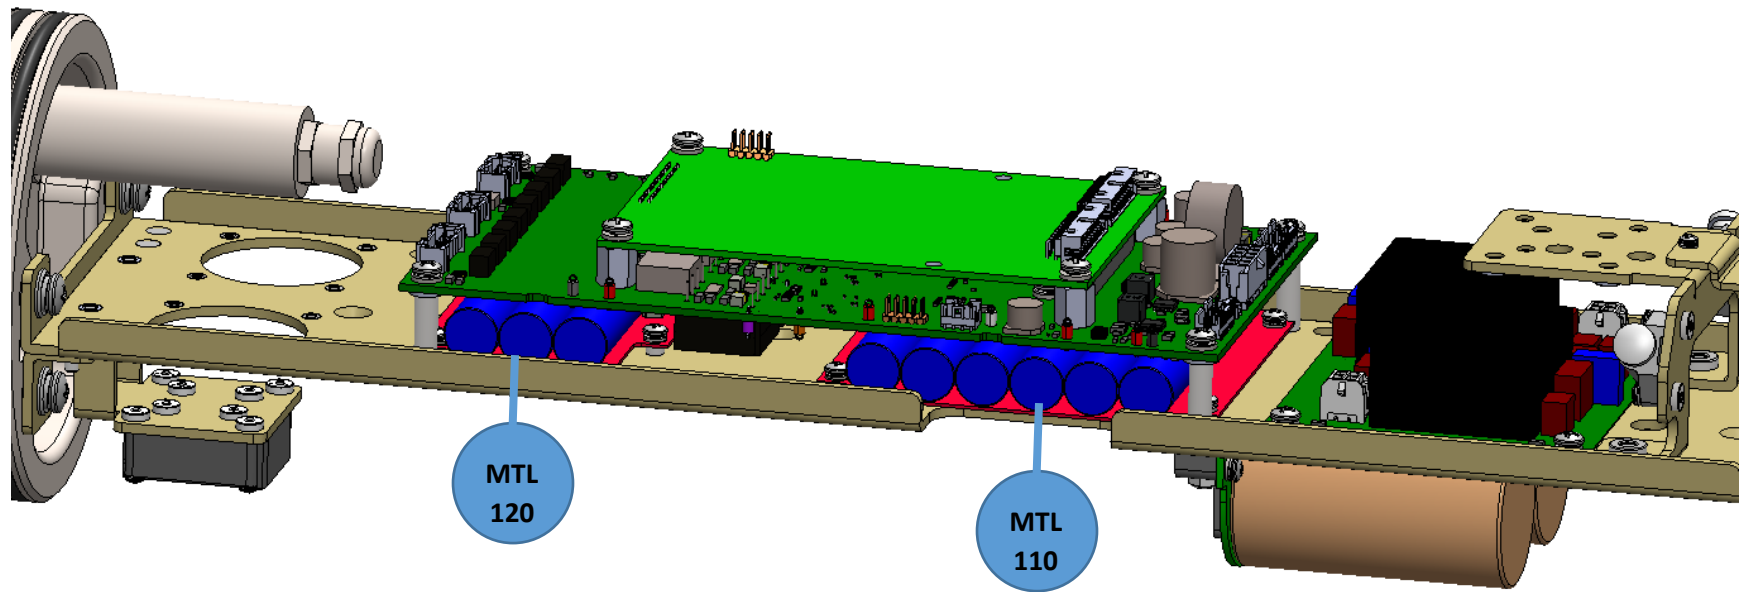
4205 Electronic Chassis Tri-Frequency 3-D Drawing
